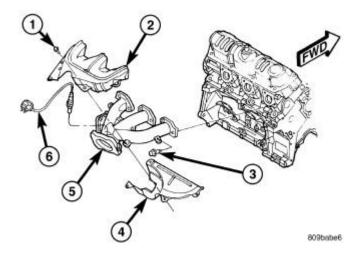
EXHAUST MANIFOLD - RIGHT Courtesy of CHRYSLER LLC
